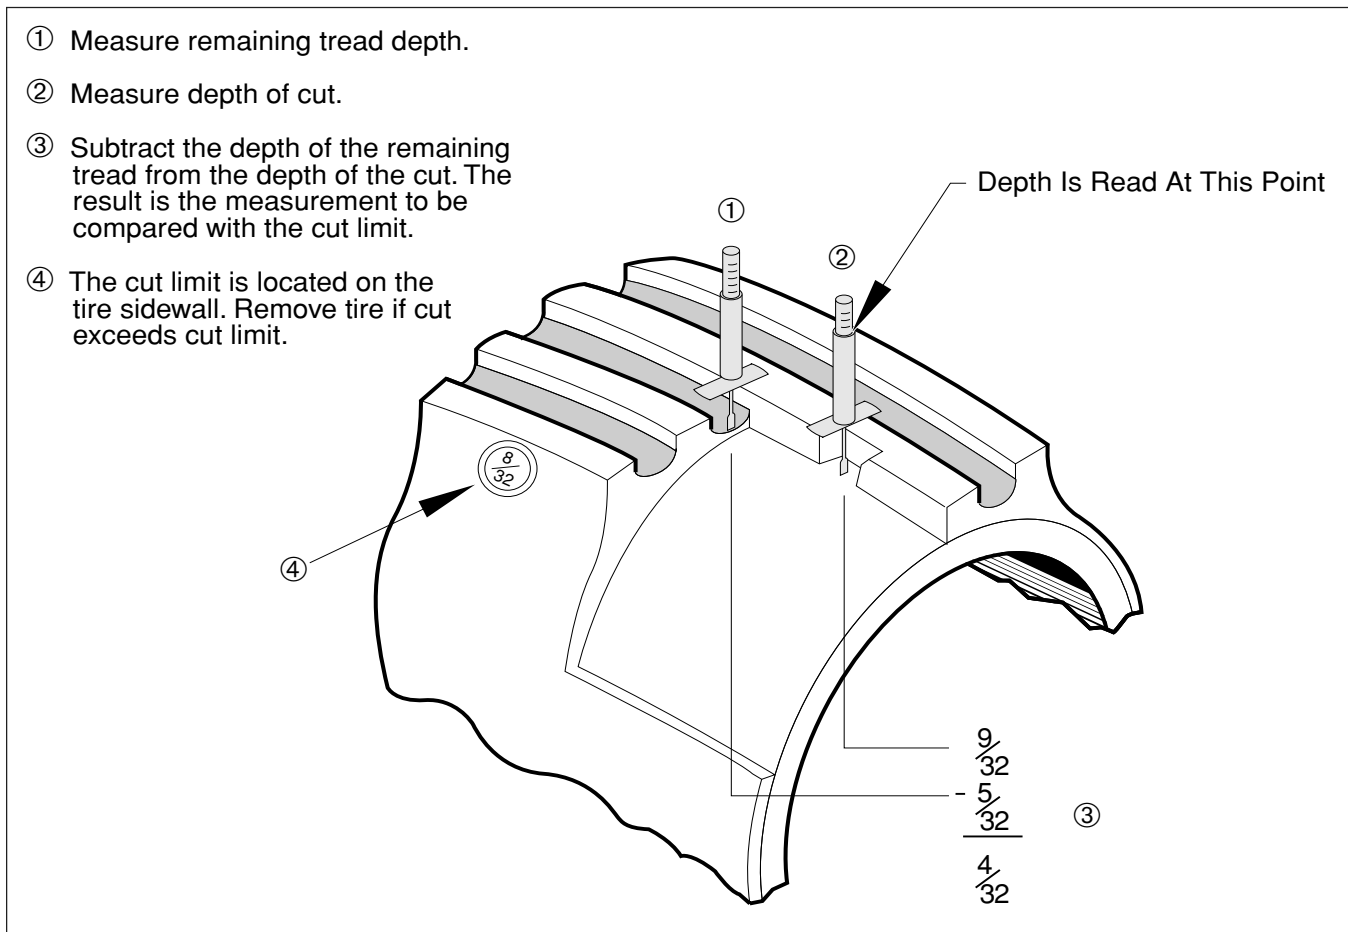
Method of Measuring Depth of Cuts, Cracks, and Holes
